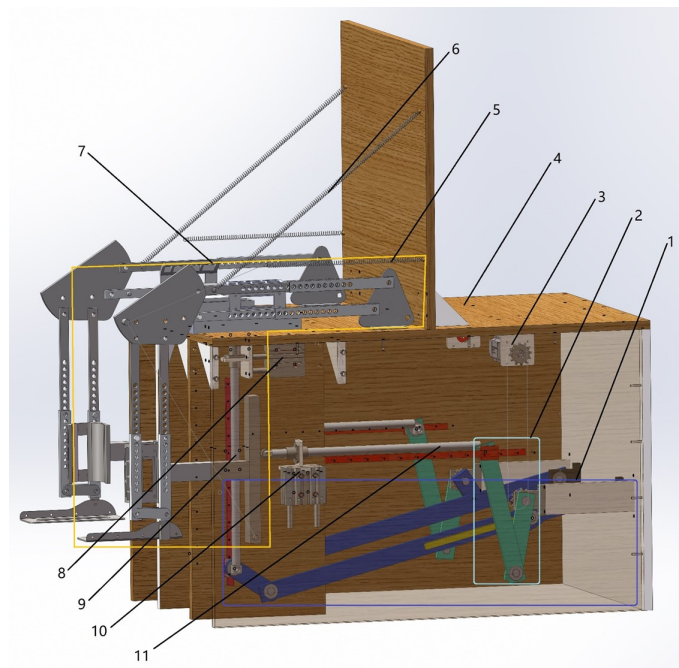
Three-dimensional diagram of the lower limb rehabilitation training device. 1—drive mechanism 2; 2—drive mechanism 1; 3—motor; 4—seat; 5—calf spring; 6—thigh spring; 7—lower limb exoskeleton; 8—cylinder 1; 9—thigh push rod; 10—cylinder 2; 11—calf push rod.
